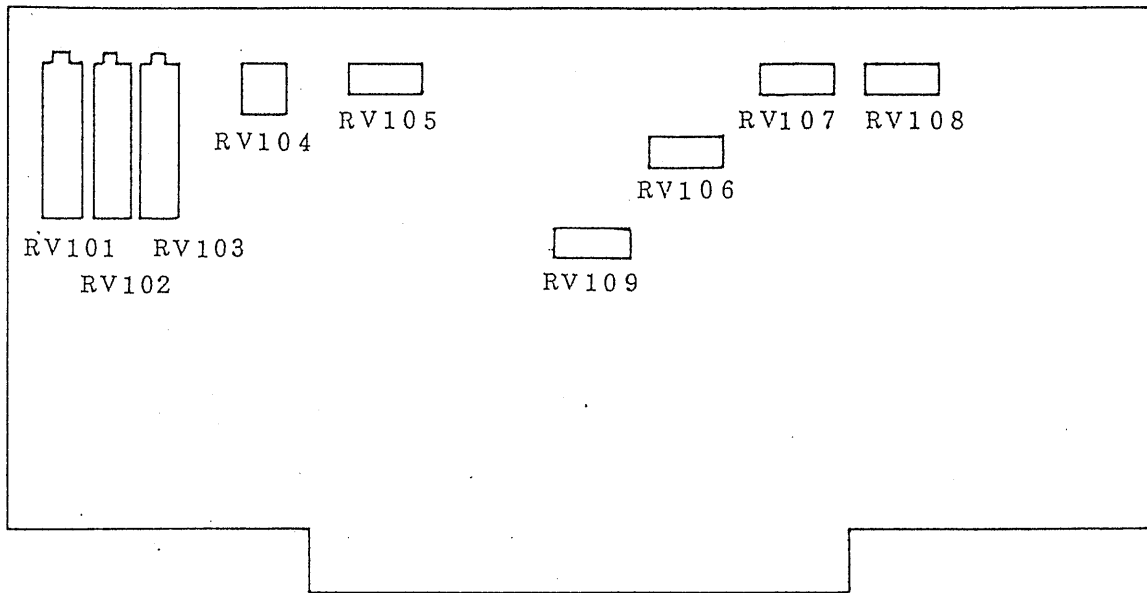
OUTPUT REGULATOR PC BOARD LAYOUT
